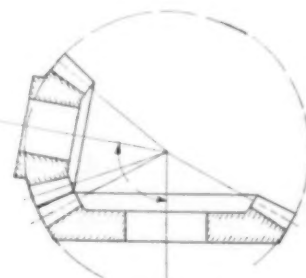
BRINGING THE FACES PARALLEL AS THE GEARS ENTER CONTACT
